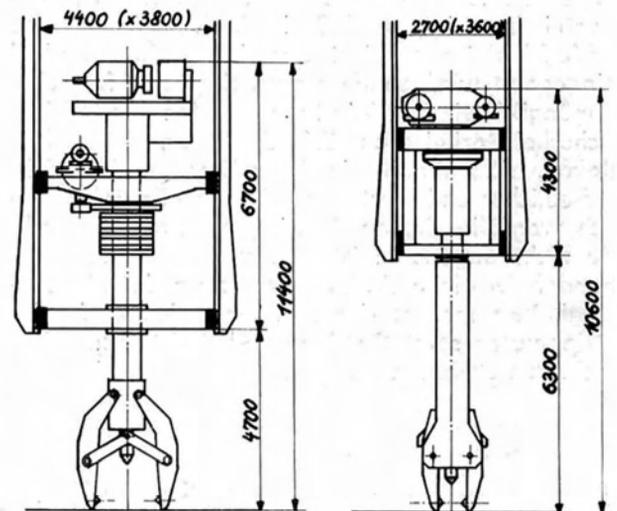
Stripping Crane, 16/20 tons capacity, 180 tons ram pressure, span 27,5 m
